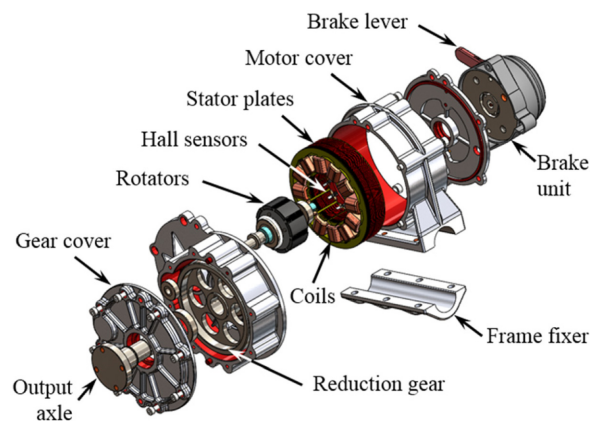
The exploded view of developed BLDC in-wheel motor for the foldable electric wheelchair
